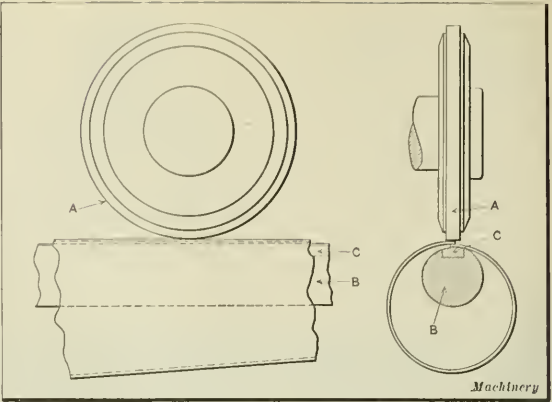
Diagram illustrating Method of lap-welding Coffee Pots on Machine shown in Fig. 9
